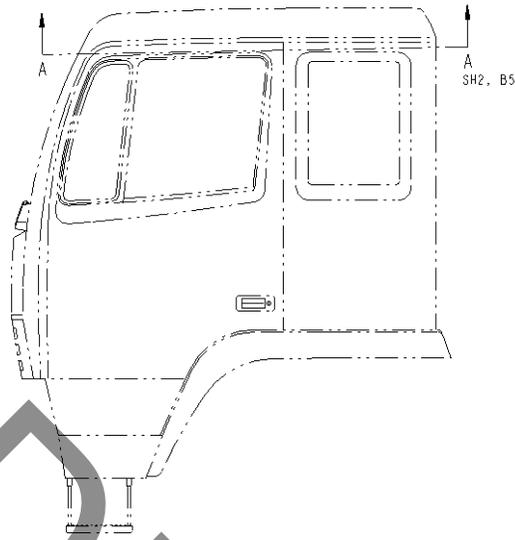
COMPLETED DRAWING - CAB SIDE VIEW
